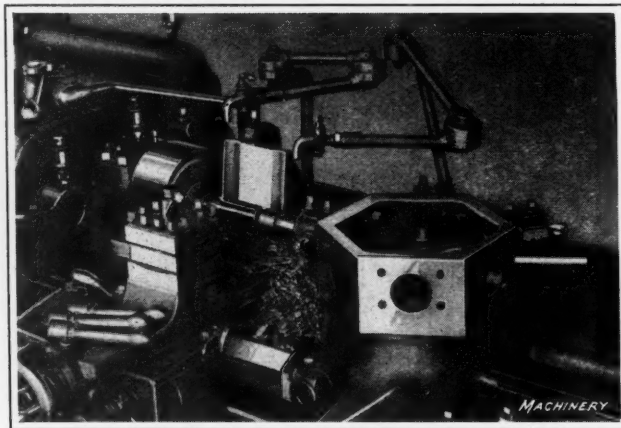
Machine Set-up employed in manufacturing Part shown in Fig. 24
